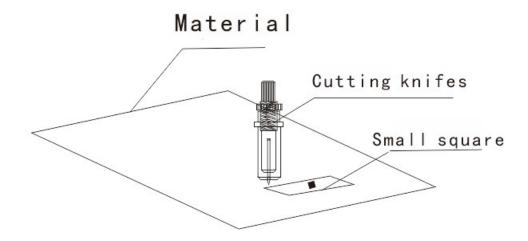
Figure I Press the paper feed key, the material enters the machine, and then install the cutter seat.
